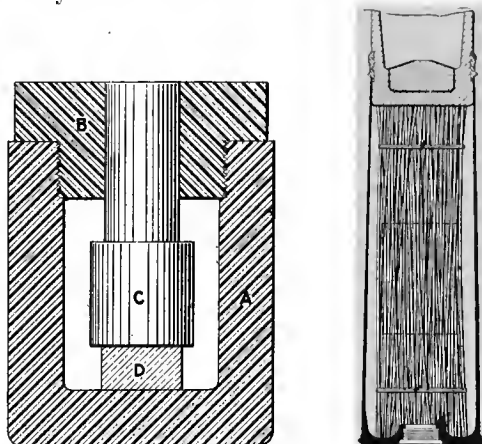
PROOF-PRESSURE TESTING DEVICE FIG. 13
